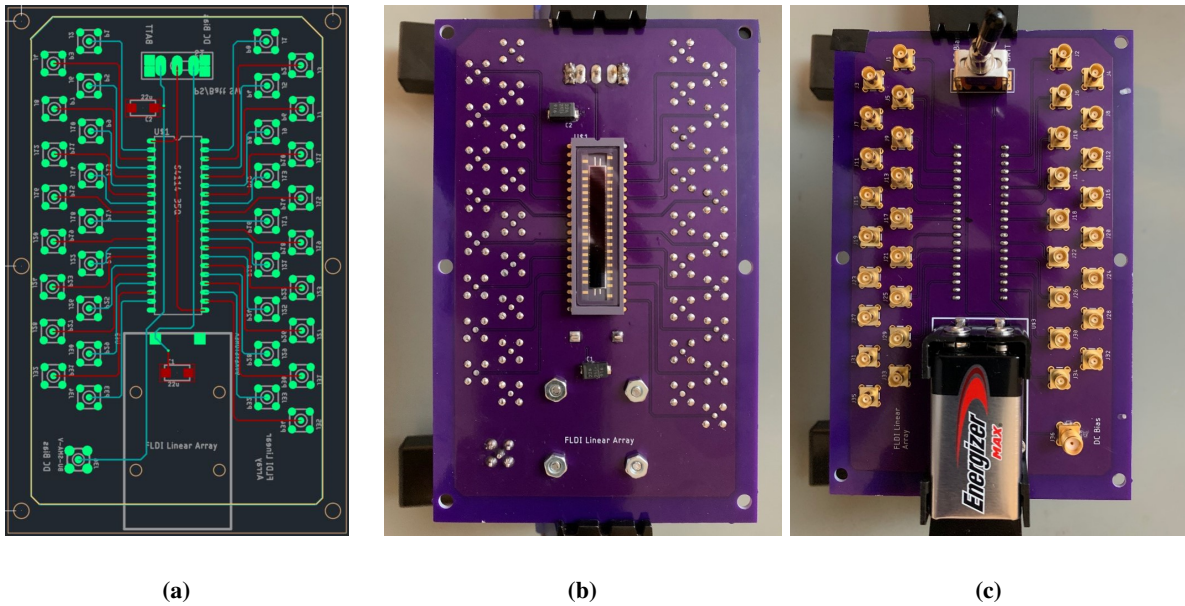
Layout of the 35-channel PCB with linear array photodiode mount, reverse bias 9 V battery or external power supply with toggle switch selection, and breakout connectors. (a) PCB design, (b) front image of assembled PCB, and (c) back image of assembled PCB.
